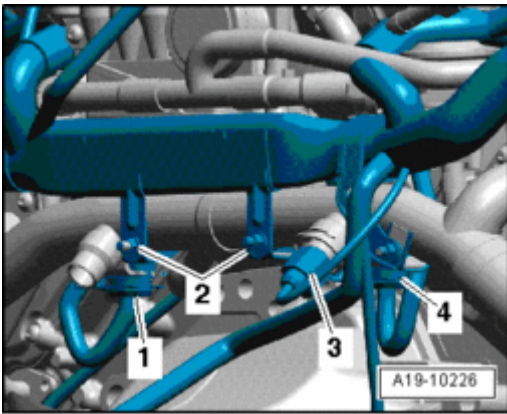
Identifying Nuts, Wiring Harness Bracket From Rear Coolant Pipe, Engine Coolant Temperature (ECT) Sensor G62 Electrical Connector & Rear Coolant Pipe Bracket Electrical Connectors
